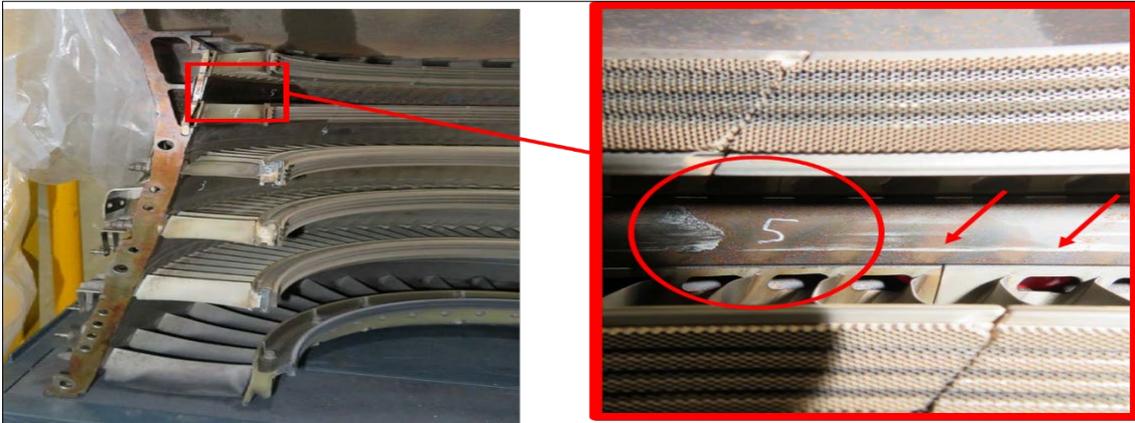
FWD HPC Upper Stator Inspection (HPT 5)
